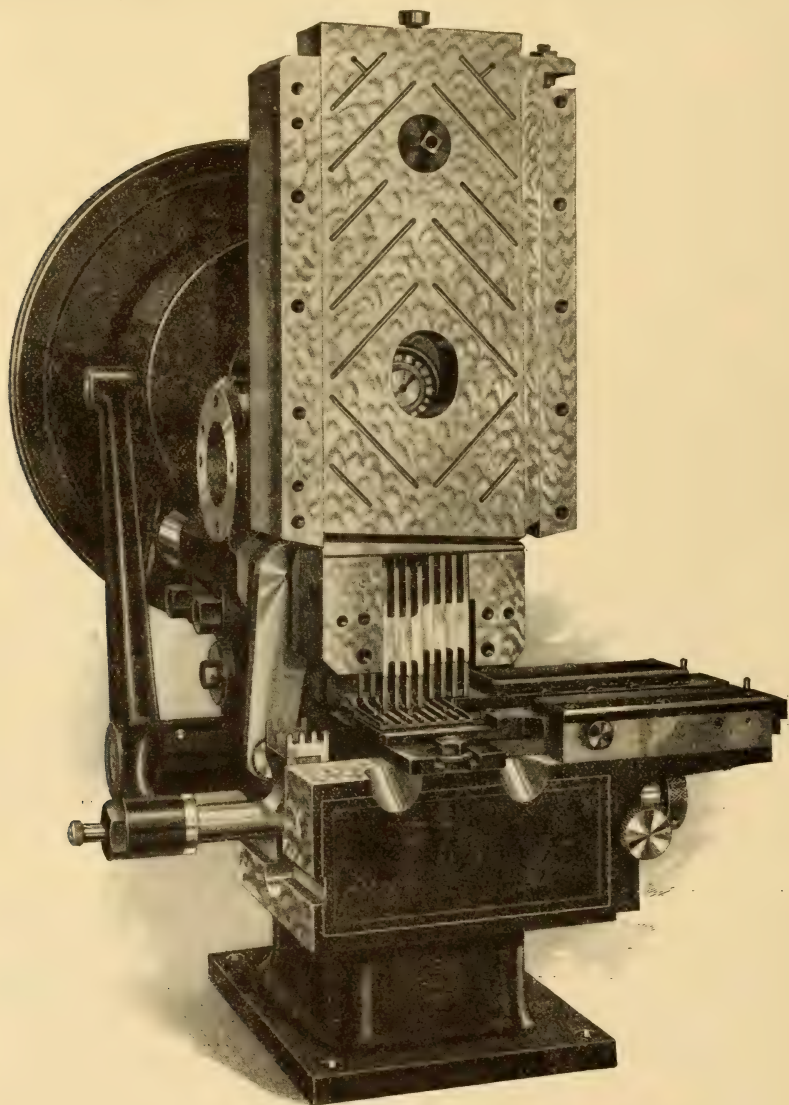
Bell & Howell perforator. Detail section showing ram, gib, stripper, film guide, chute and guide rails, shuttle, punch, pilot and die.
